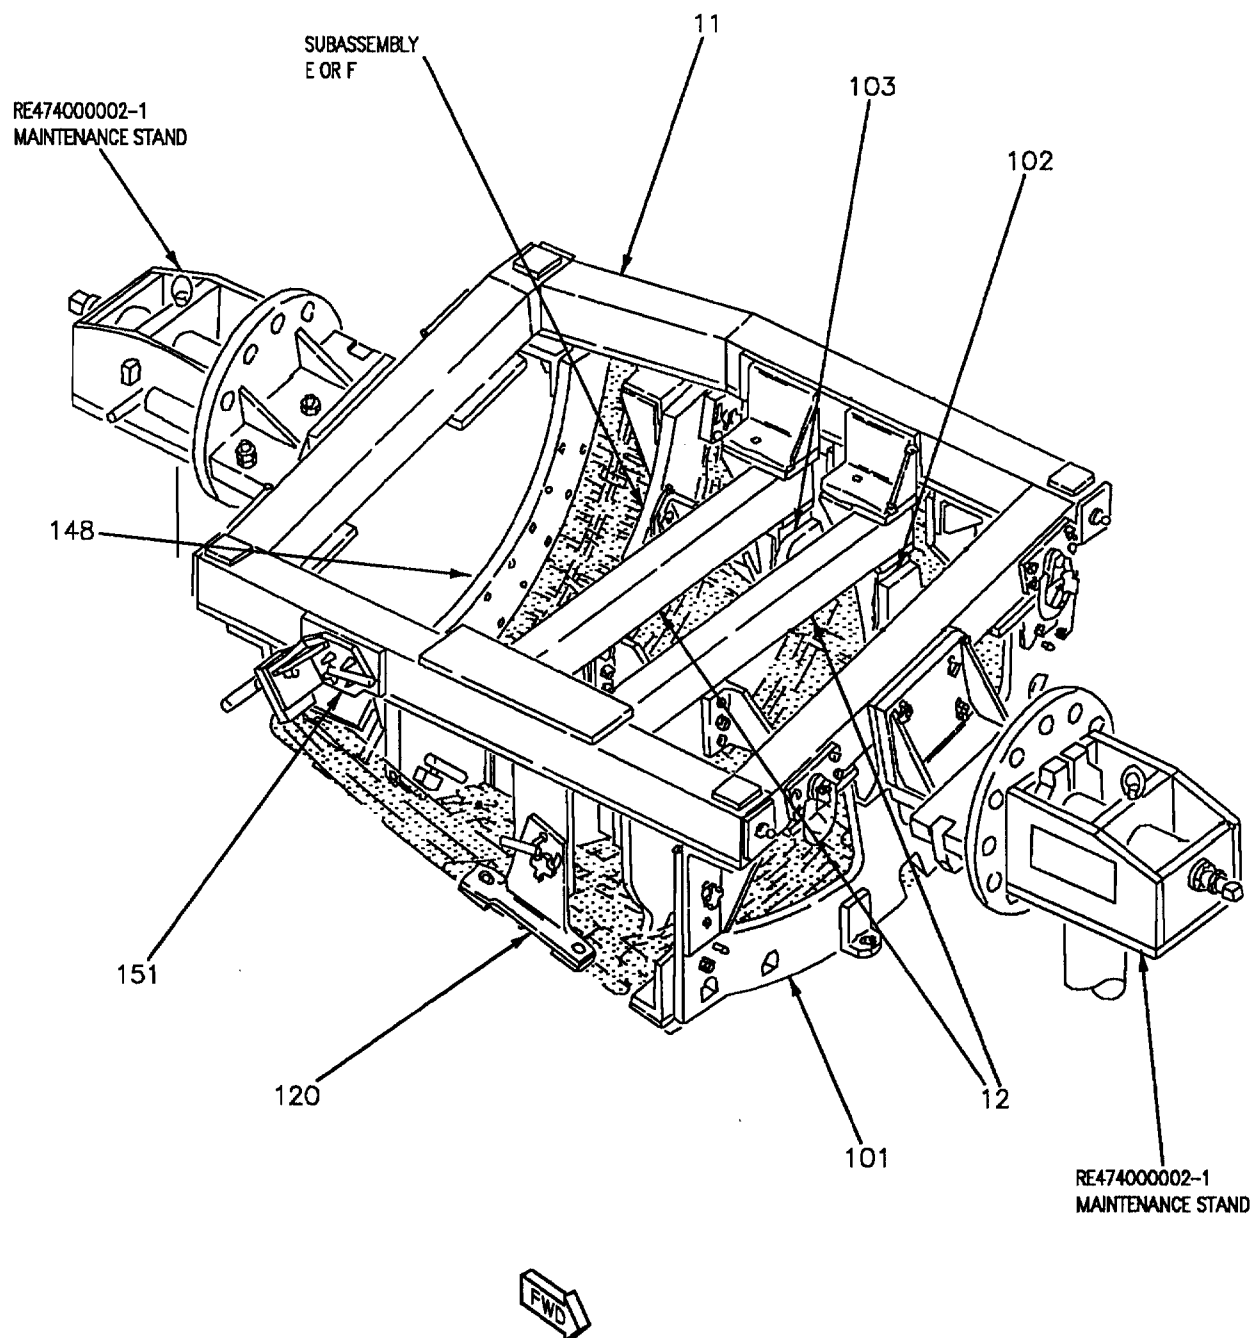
Installation of Door Into Maintenance Fixture (Sheet 3)
